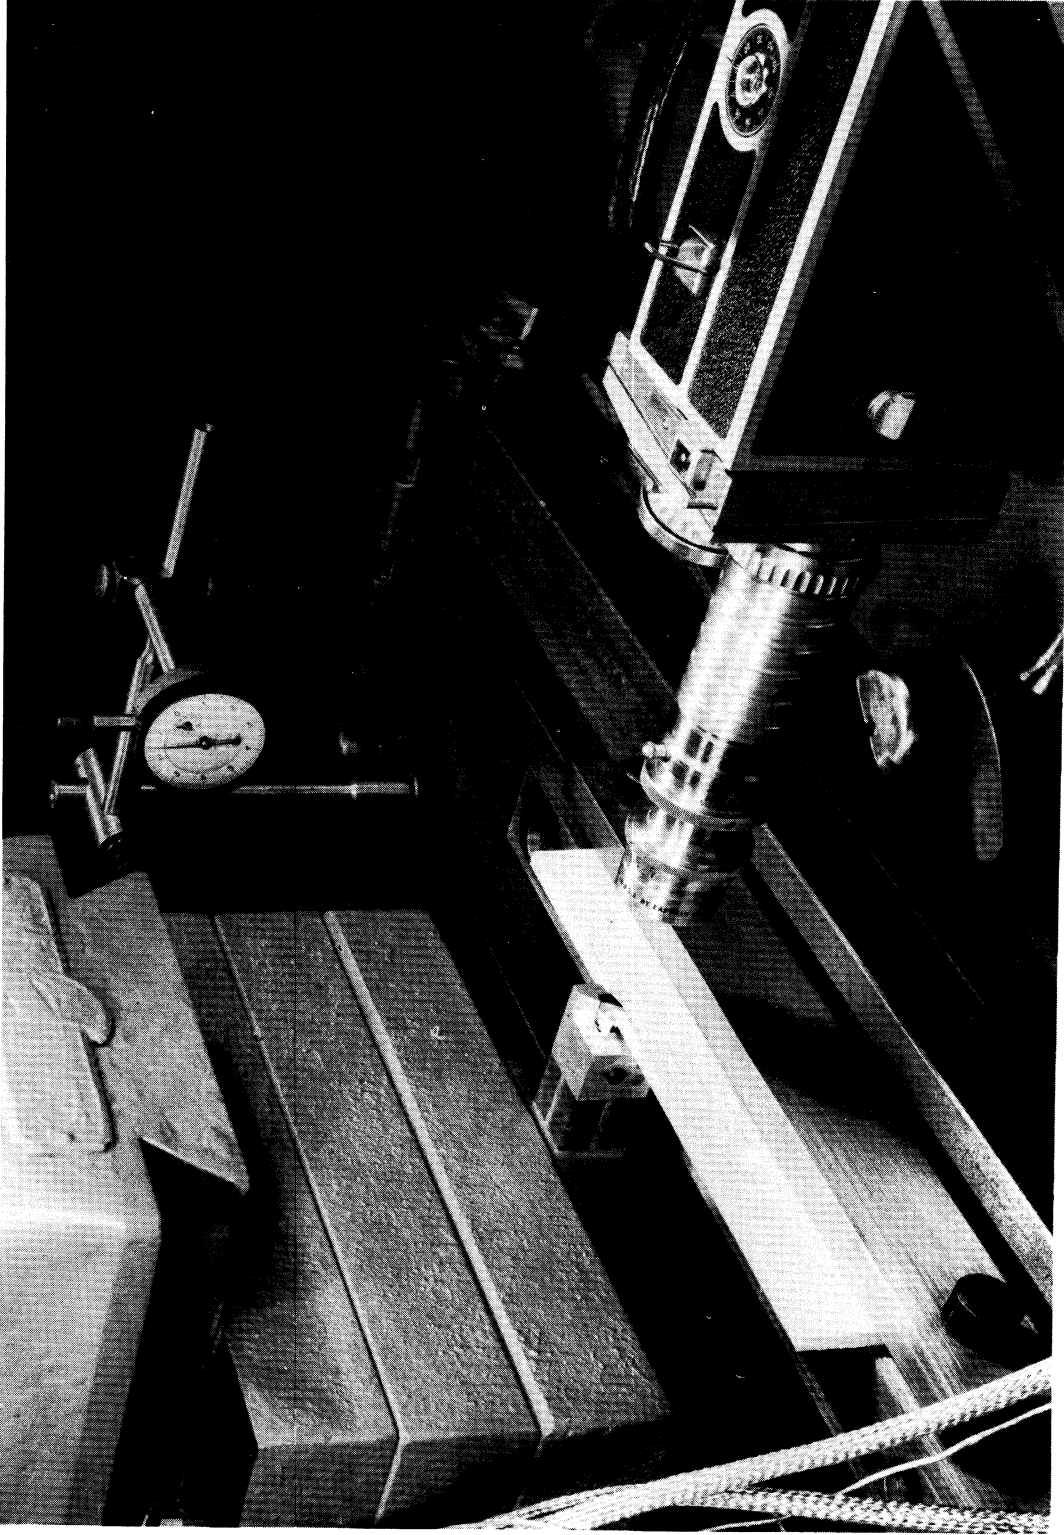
Close-up of machining operation showing the work piece, tool dynamometer, and motion picture camera used to correlate instantaneous tool forces with observations of chip formation.
